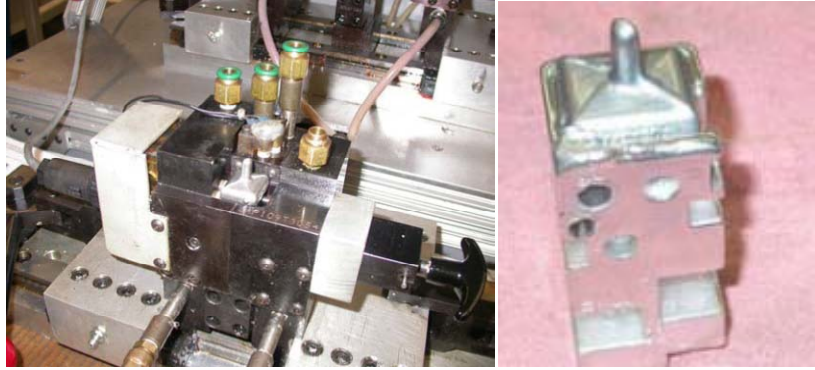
Encapsulation Fixture & Encapsulated Part
